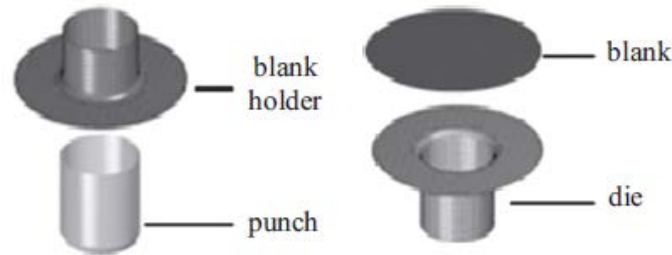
Tools used in the micro-deep drawing process plotted by SOLIDWORKS-3D CAD Design Software
